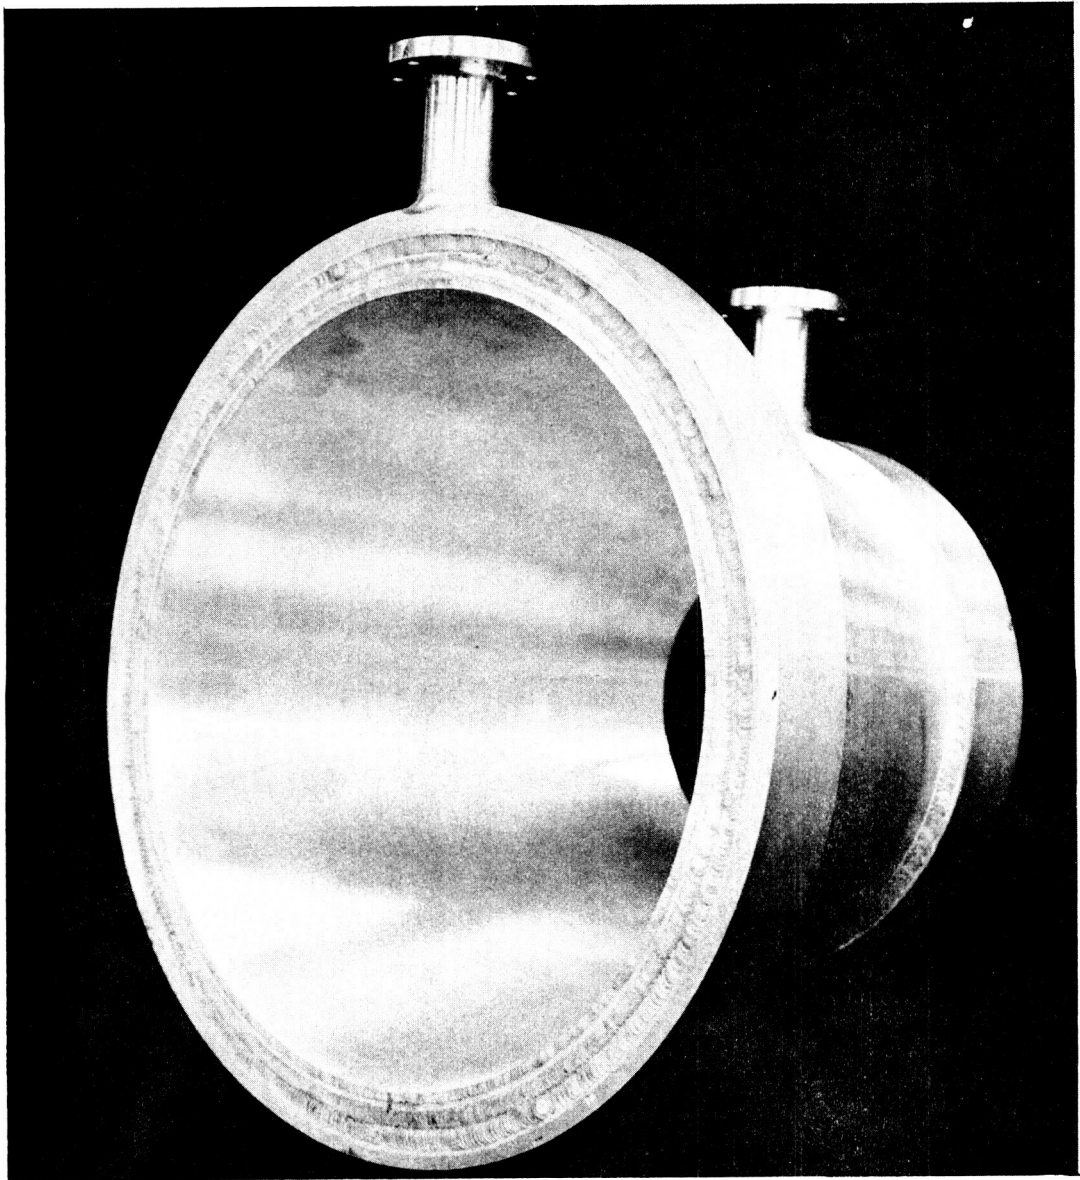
Water Cooled Aluminum Nozzle Extension Assembly
